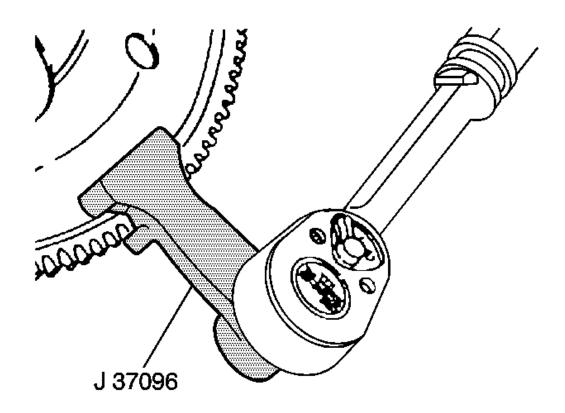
Holding Flywheel Courtesy of GENERAL MOTORS CORP.
